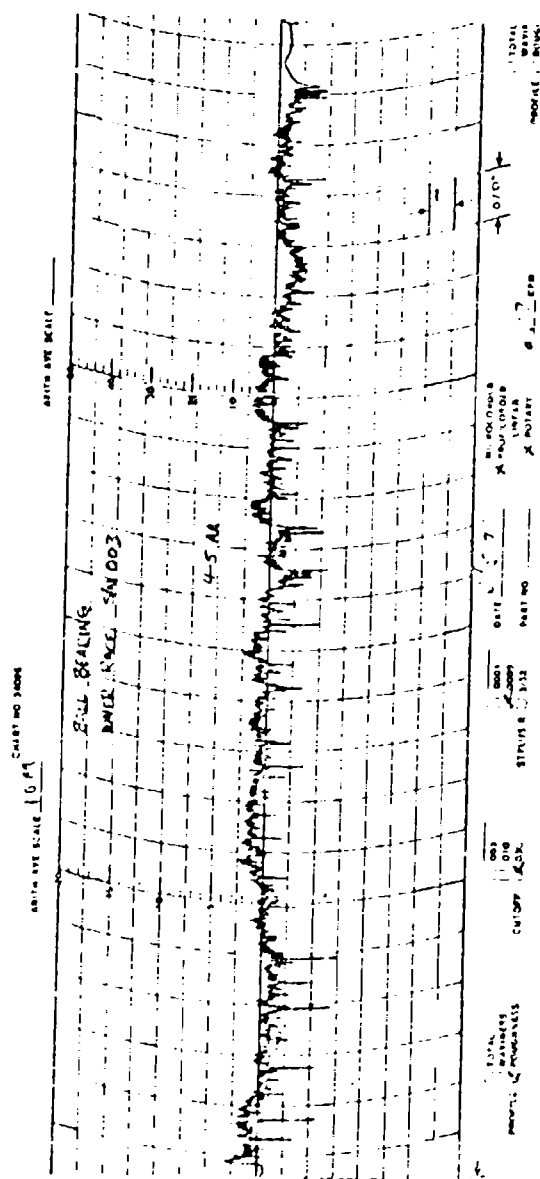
Ball Bearing S/N 003 Thrust Inner Race Surface Texture and Groove Radius.
